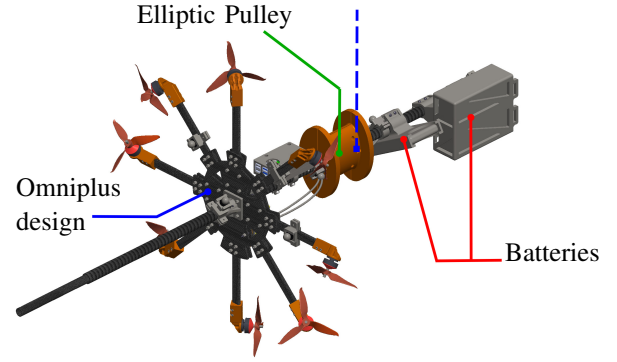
CAD view of the STRAD robot (dashed blue line = elastic cable)
